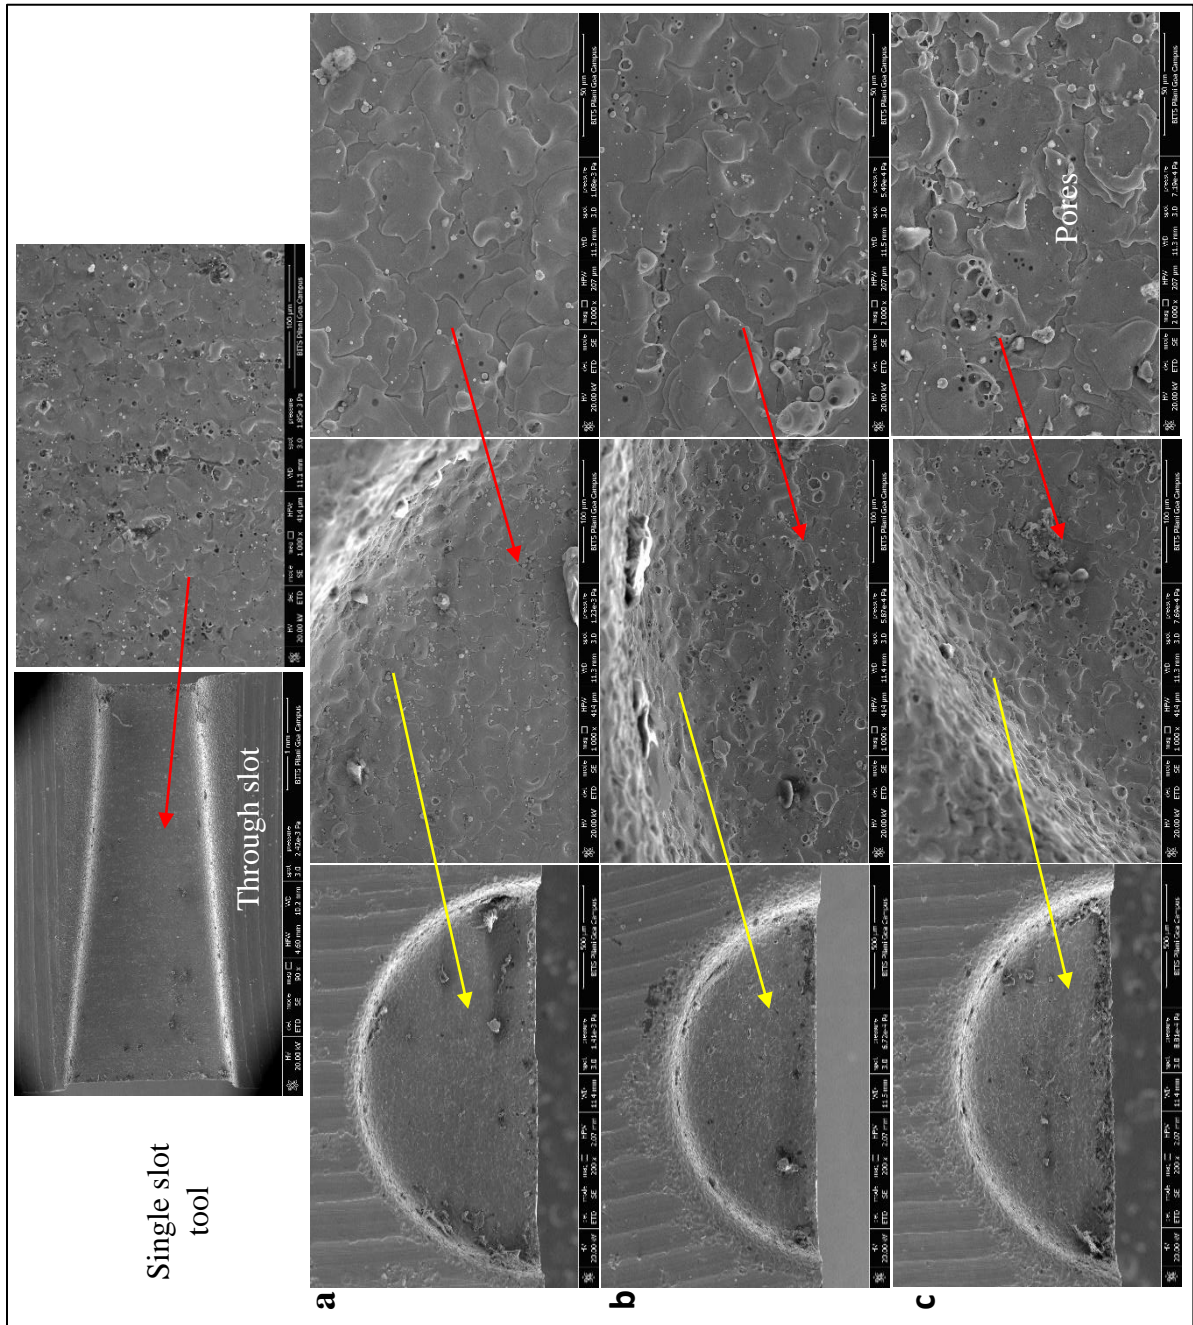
SEM micrograph morphology of channel surface machined using (a) cylindrical tool (b) slotted tool and (c) deep slot tool
